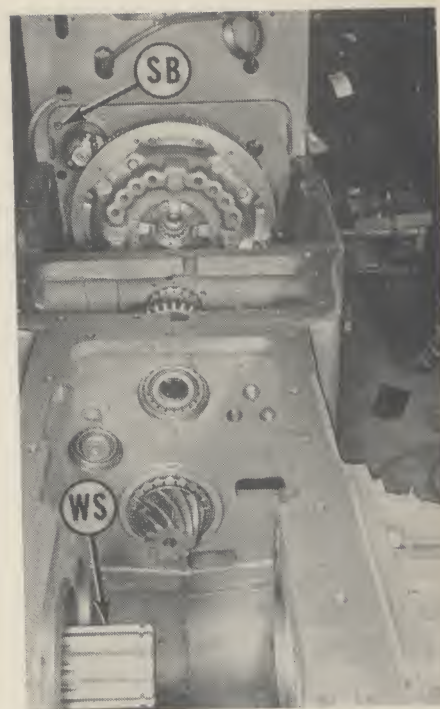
A—Rear view six cylinder model showing spring loaded Borg-Beck 12E clutch. Pressed steel cover shown at (31) in Fig. 0457 must be removed for access to starter mounting bolts (SB). Wheel axle shaft is (WS).
